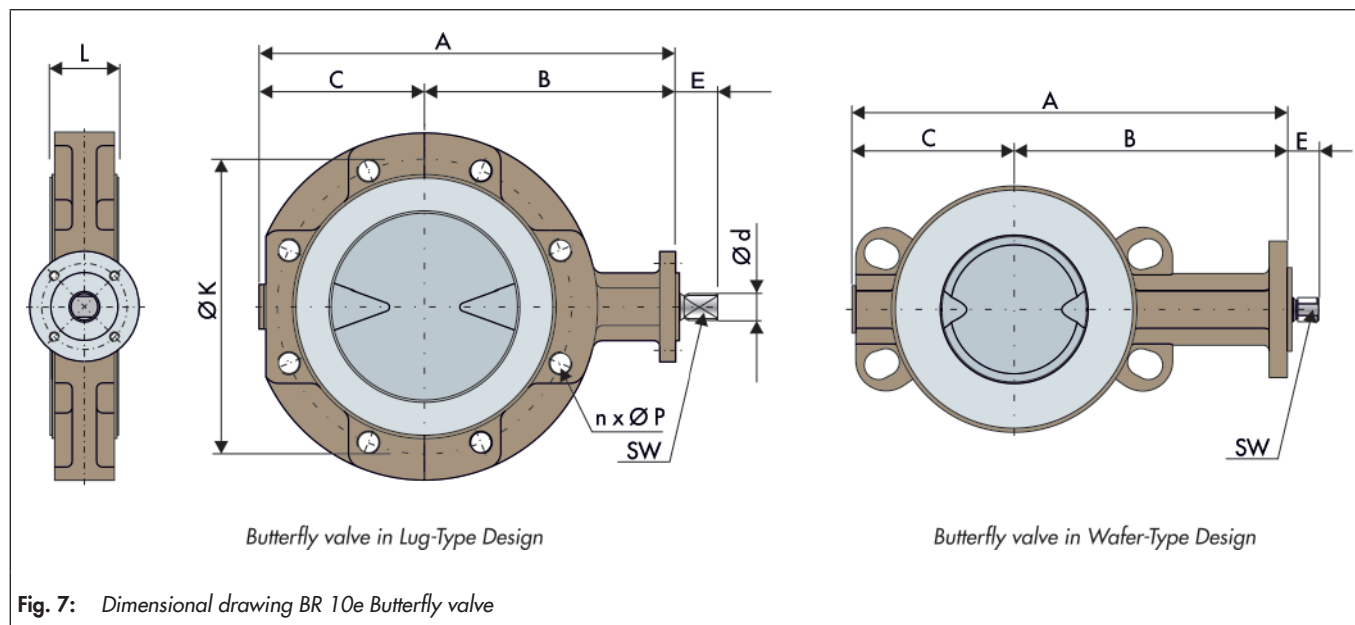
Dimensional drawing BR 10e Butterfly valve
